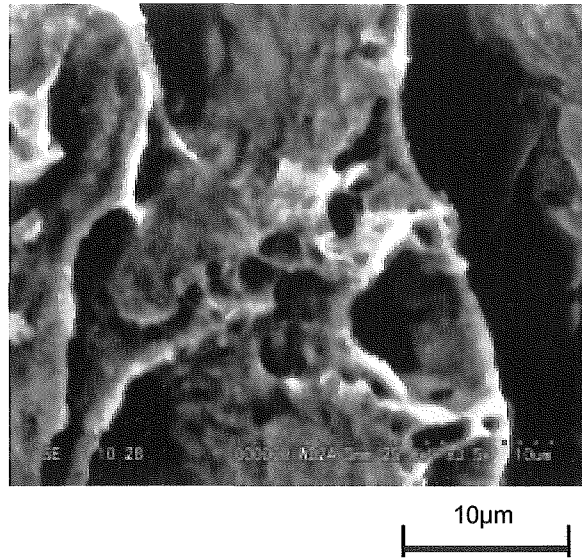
Dimple marks observed on the outer side of fractured face
